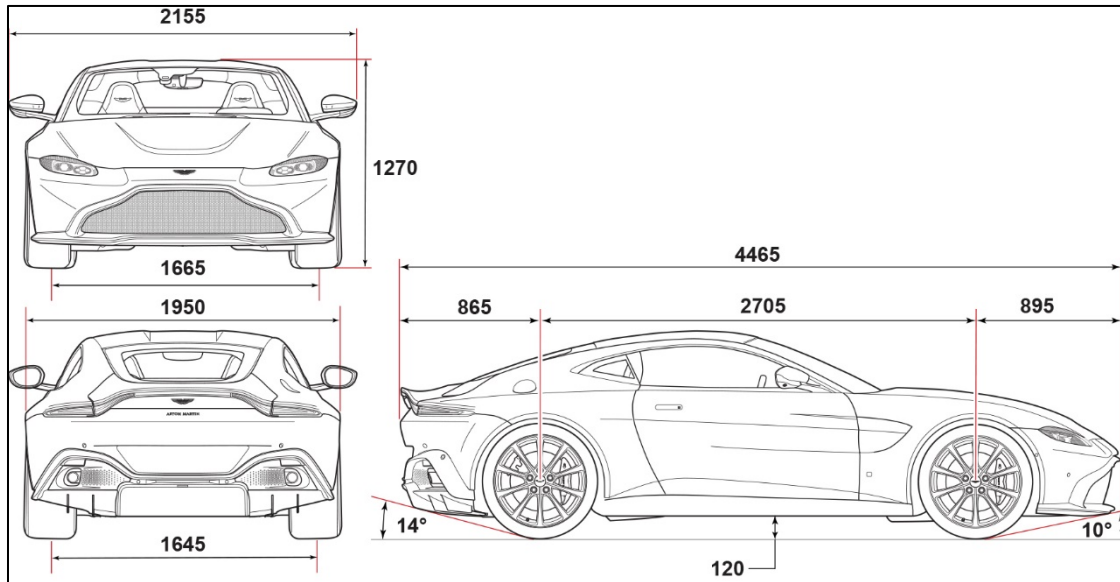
Coupe Exterior Dimensions with standard front bumper (in millimetres)
